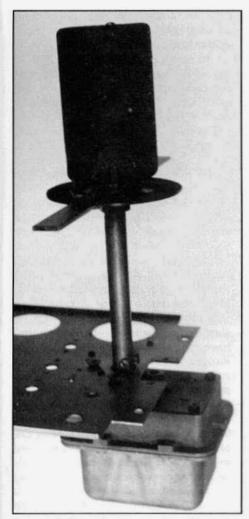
Homebrew rotating fixture that spins the just-painted dynamotor. This prevents runs.
